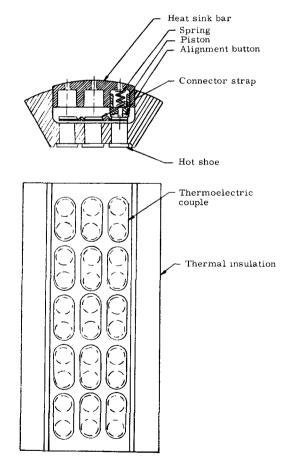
THERMOELECTRIC MODULE AND COLD END HARDWARE ASSEMBLY
